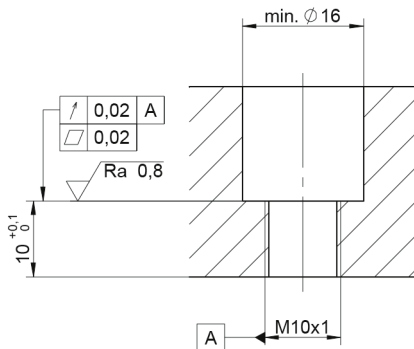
Mounting bore (4-stroke application) for flush mounting
